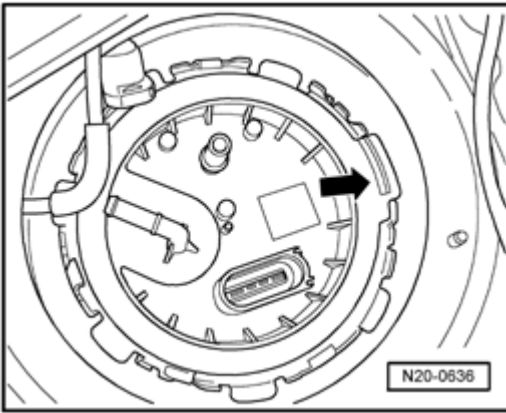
Flange With Locating Tab Facing In Direction Of Travel
